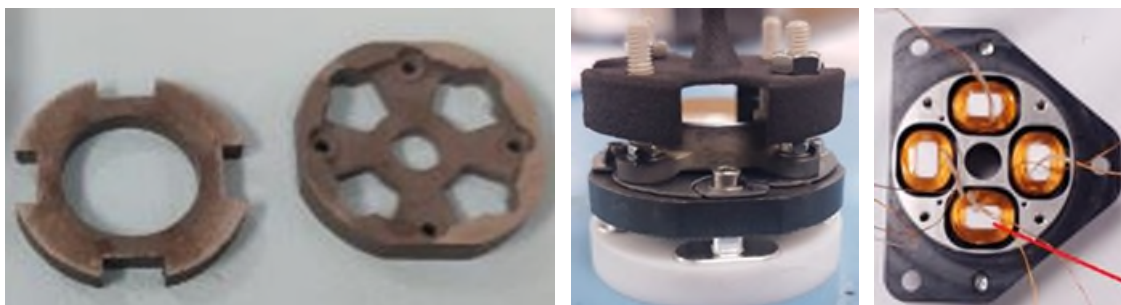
M-FSM SMC parts (left), tooling for mirror & moving part (center), and coils' assembly (right)
